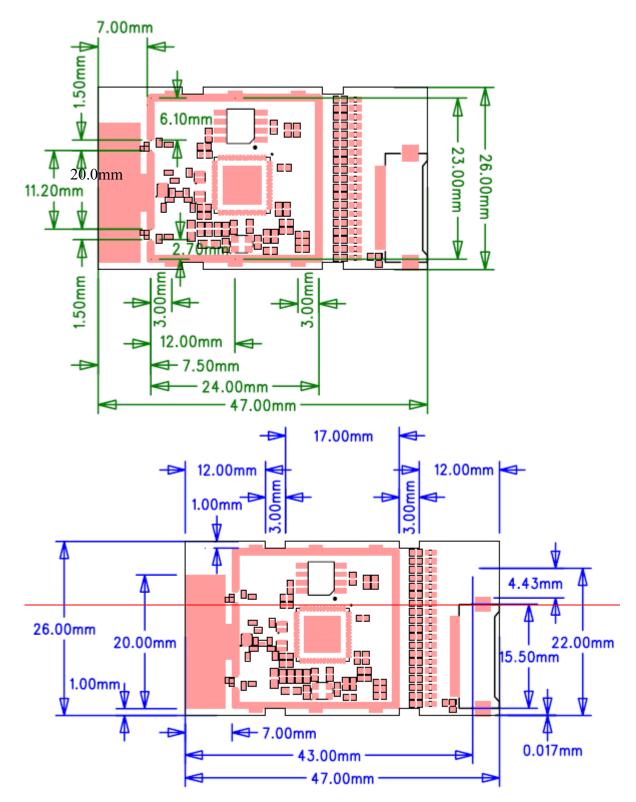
SWA51 Module Outline and Mechanical Dimensions
